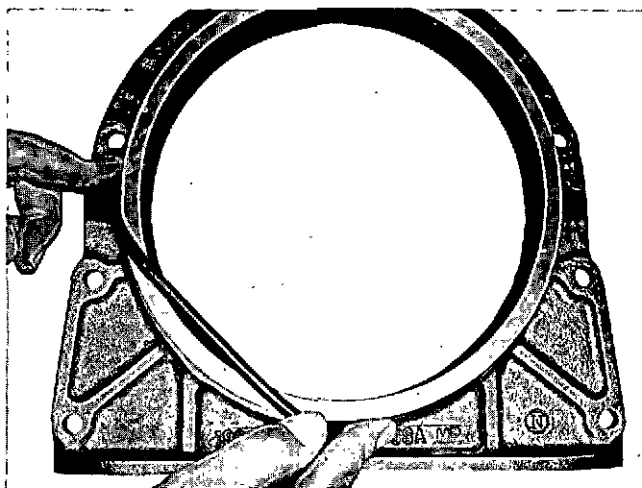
, V414217. Install rear cover "O" ring for wet-type clutch
